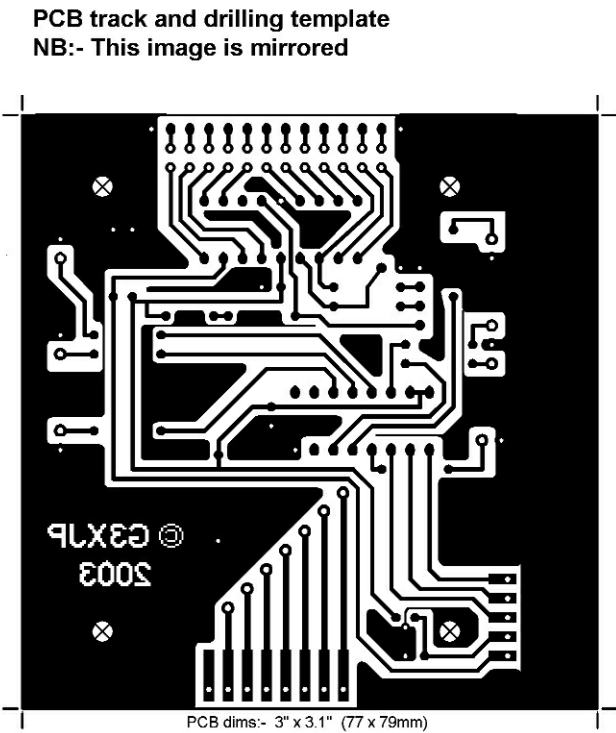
Status Board PCB track and drilling template. NB: This image is reversed
